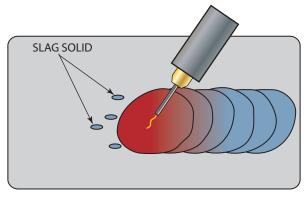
Large quantities of solid slag in front of a weld can cause slag to be trapped under the weld head
